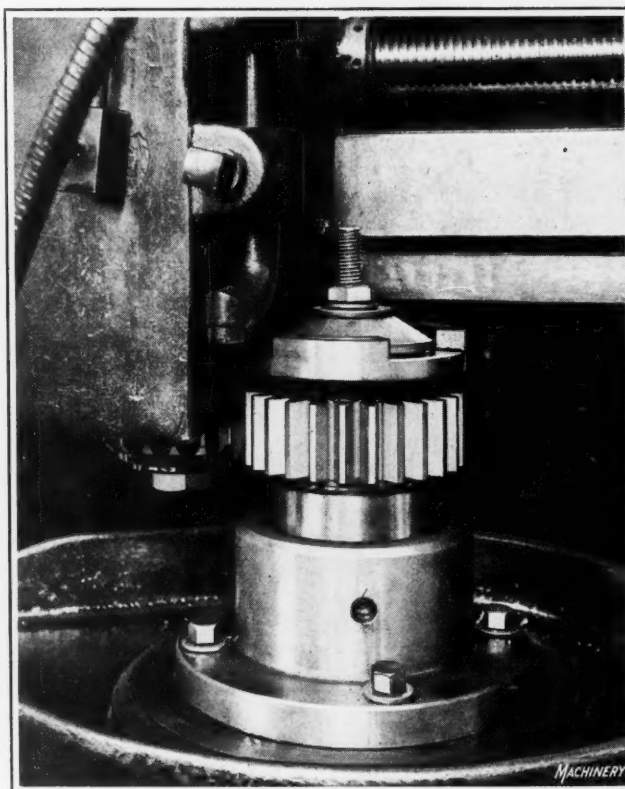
Cutting Gear that forms Integral Part of a Sleeve and is Close to a Shoulder
